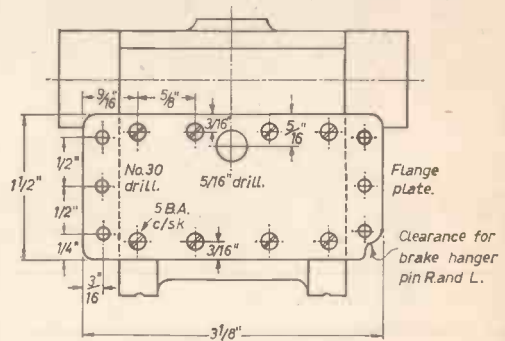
How the flange plate is fitted to slide-valve cylinder.
